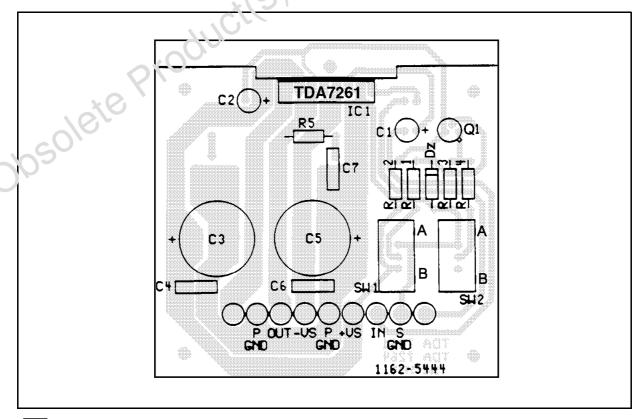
P.C. Board And Component Layout of the Demo Board Schematic (1:1 Scale)
